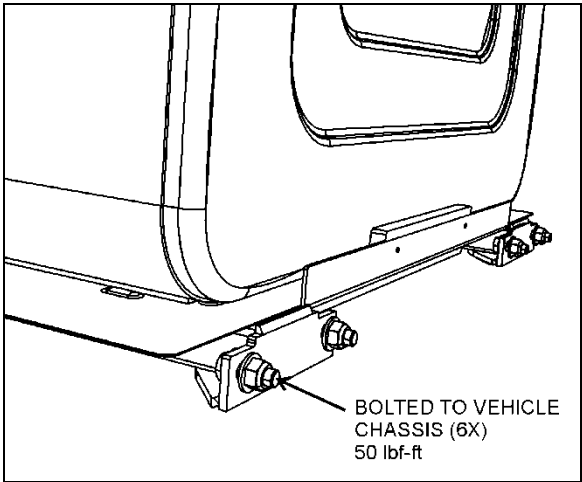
FUEL TANK SUPPORT MOUNTING BOLTS
